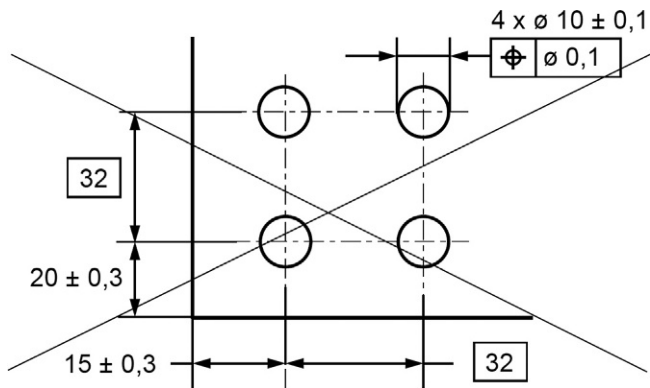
Dimensional coordinate tolerances adjacent to position tolerances, no longer used
